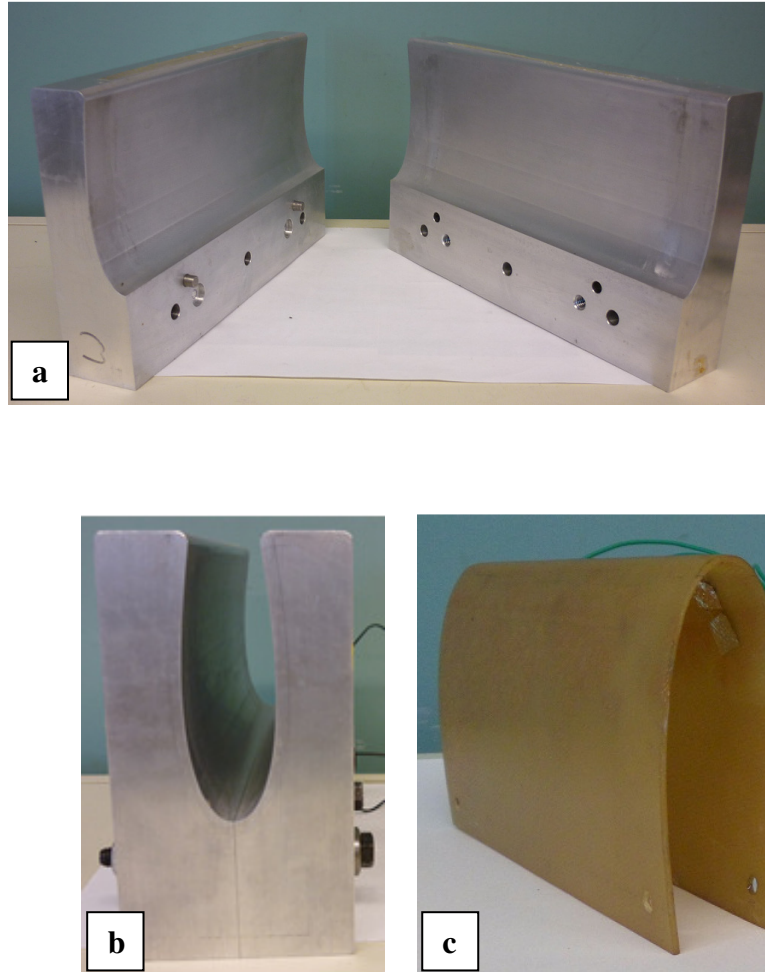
Aluminum airfoil's mold, (a) two-part disassembled mold, (b) assembled mold, (c) the cured polymer composite airfoil.
